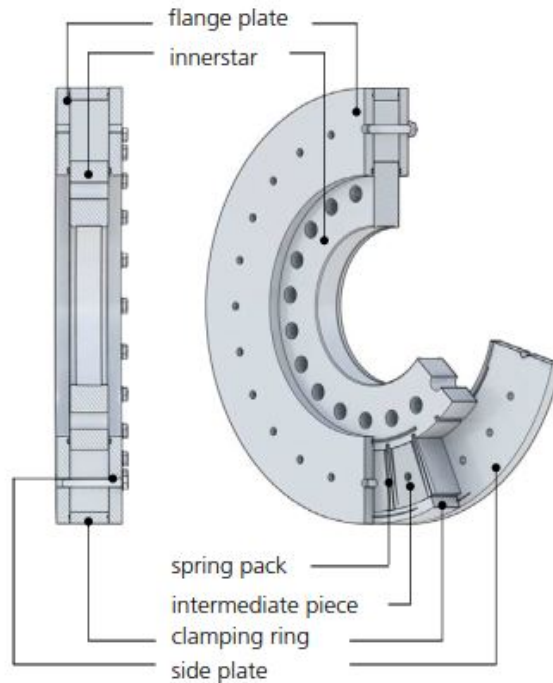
Main parts of a Geislinger - Damper 300 [5]
